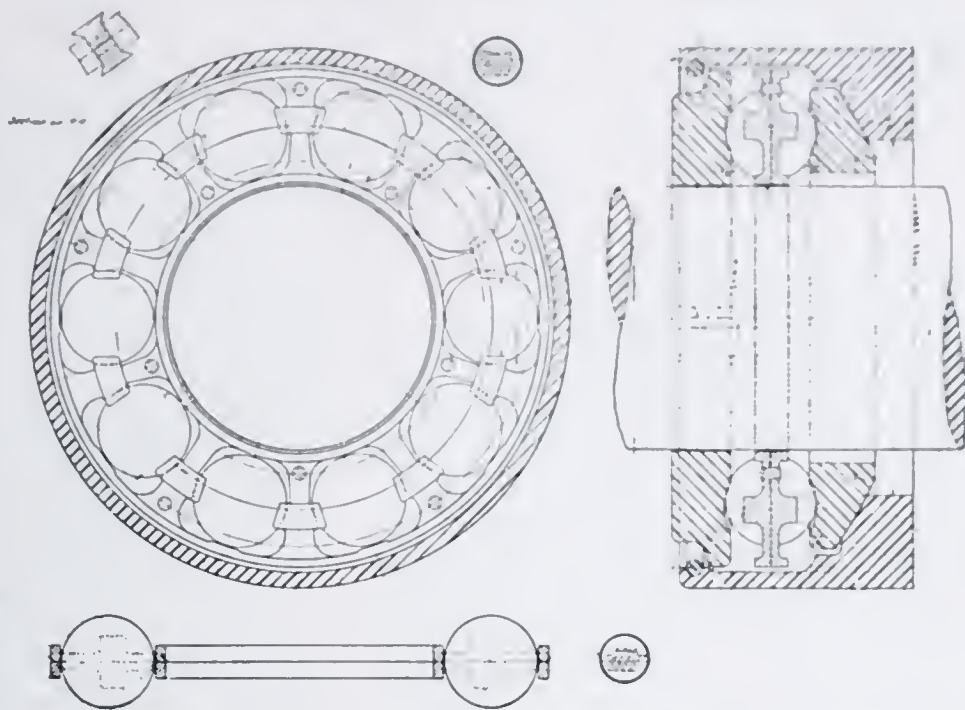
GROOVED BALL THRUST, CAGE, AND LEVELING WASHER.
